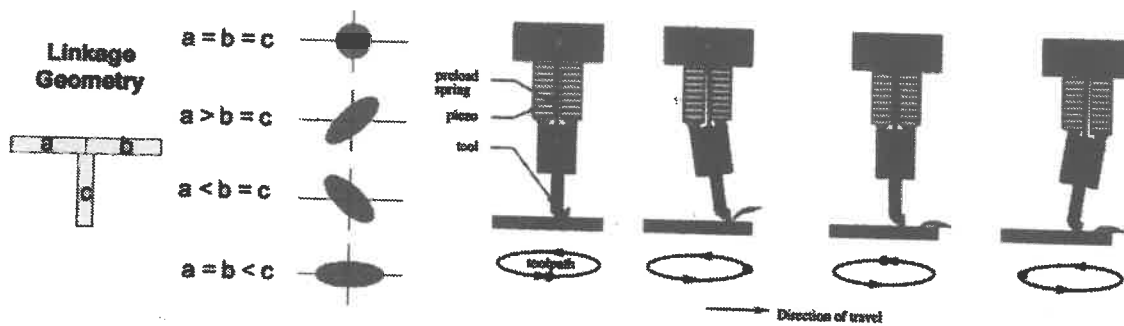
UltraMill Cutting Motion via Linkage Geometry
